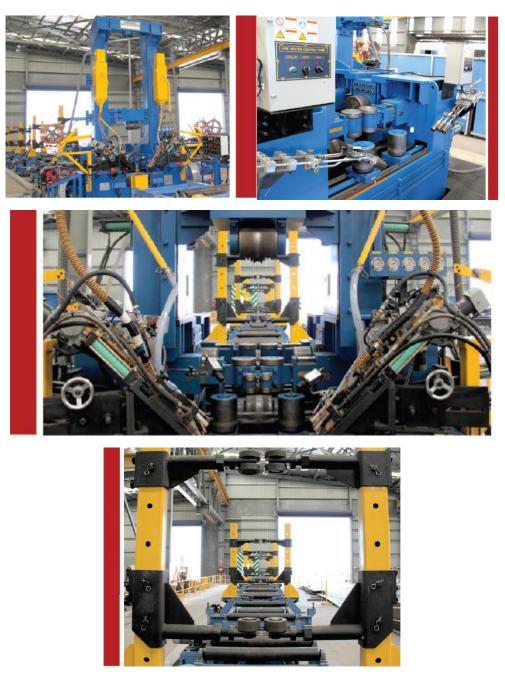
, 18, 19, and 20: Beam assembly welding and straightening
